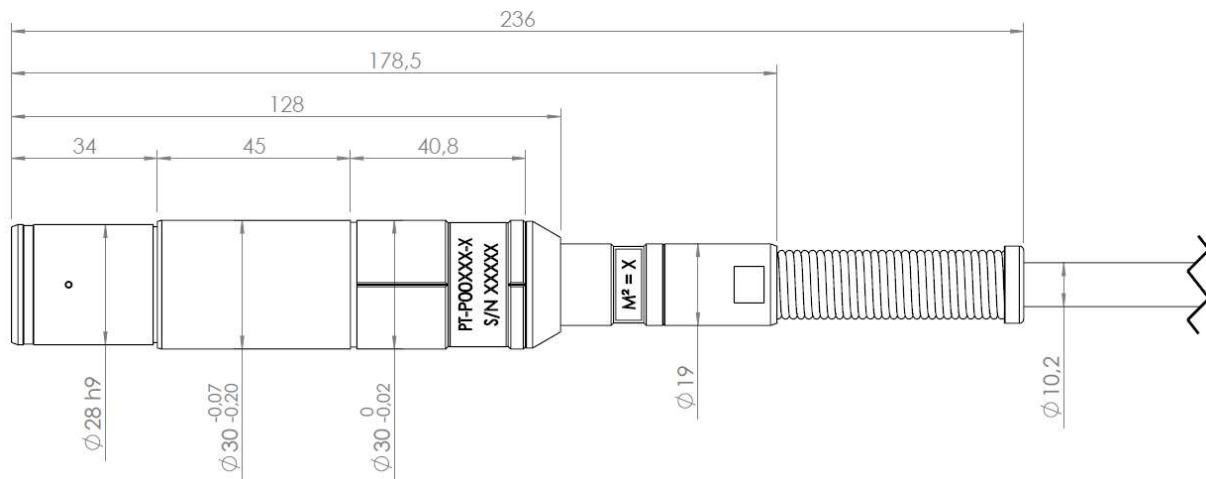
Outline Drawing – RIC Beam Delivery System
